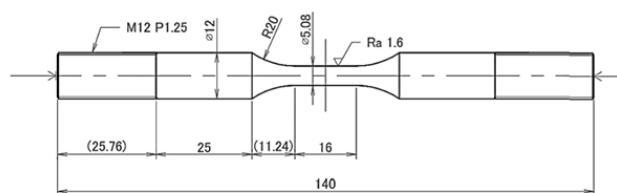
Shape and dimensions of fatigue specimen (mm).
